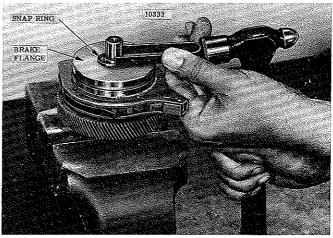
Removing Snap Ring from Load Brake Shaft
